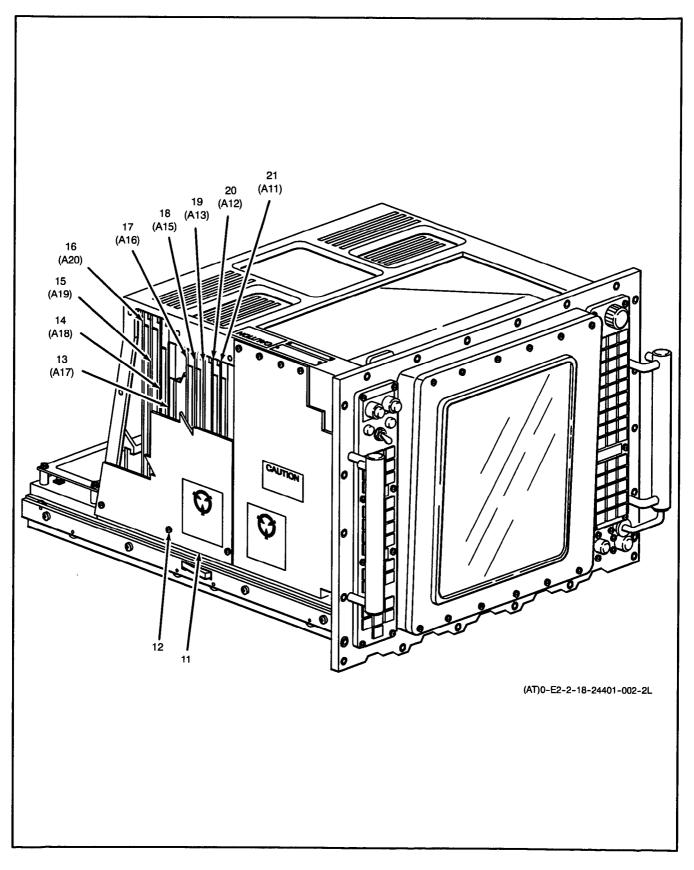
Replacement of Circuit Card Assemblies (Sheet 2)
